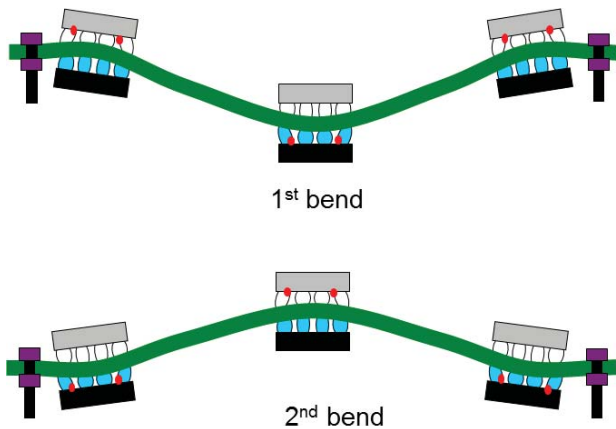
Illustration of solder ball damages for component face-down and face-up configurations.
